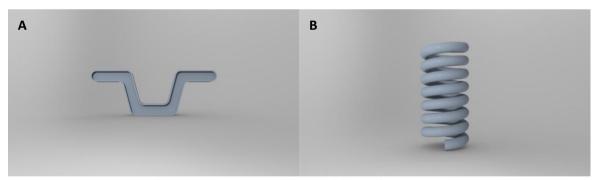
CAD models of undercarriage components: (a) side frame connecting adjacent axle assemblies; (b) suspension spring which connects to the frame and chassis.
